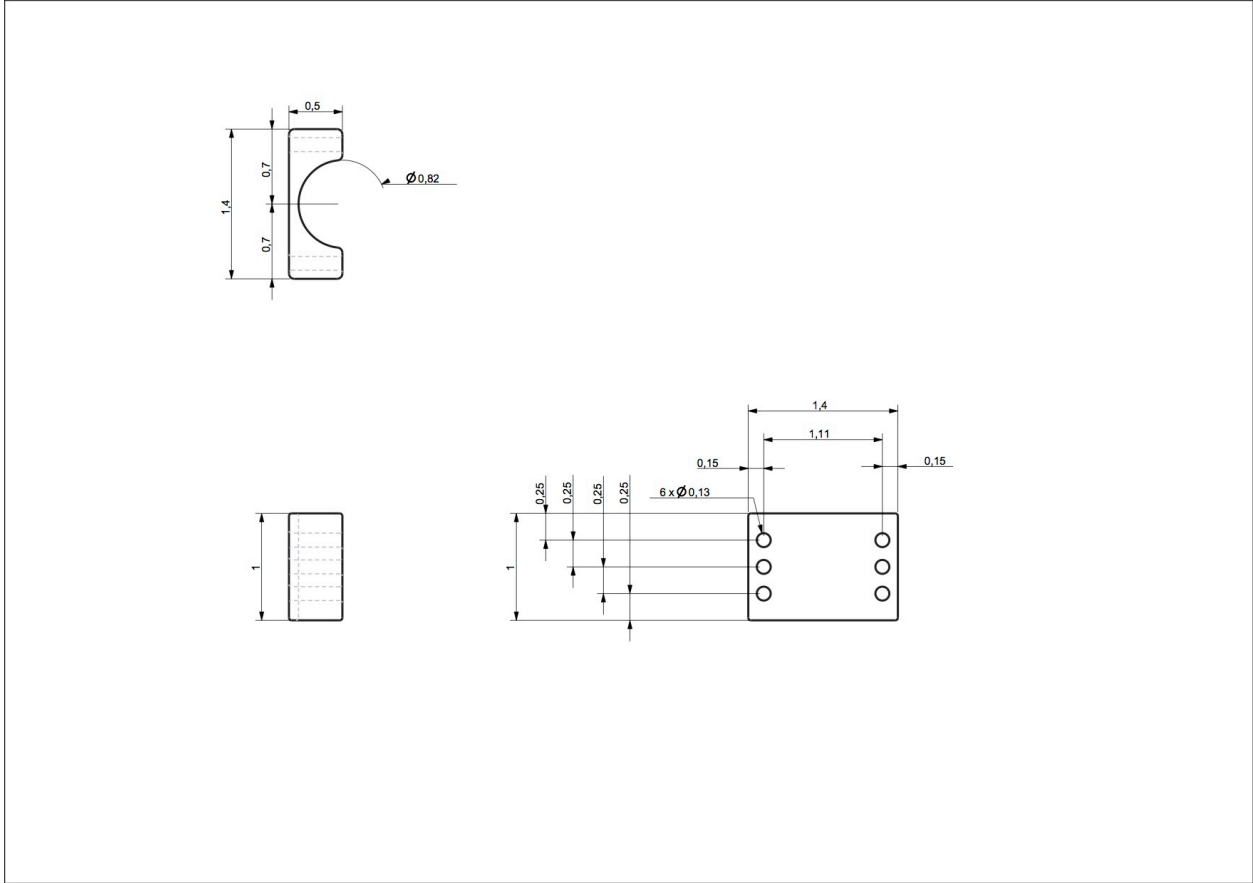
Item 32 – Base robot link 2 holder for delrin spring mount (Inches)
